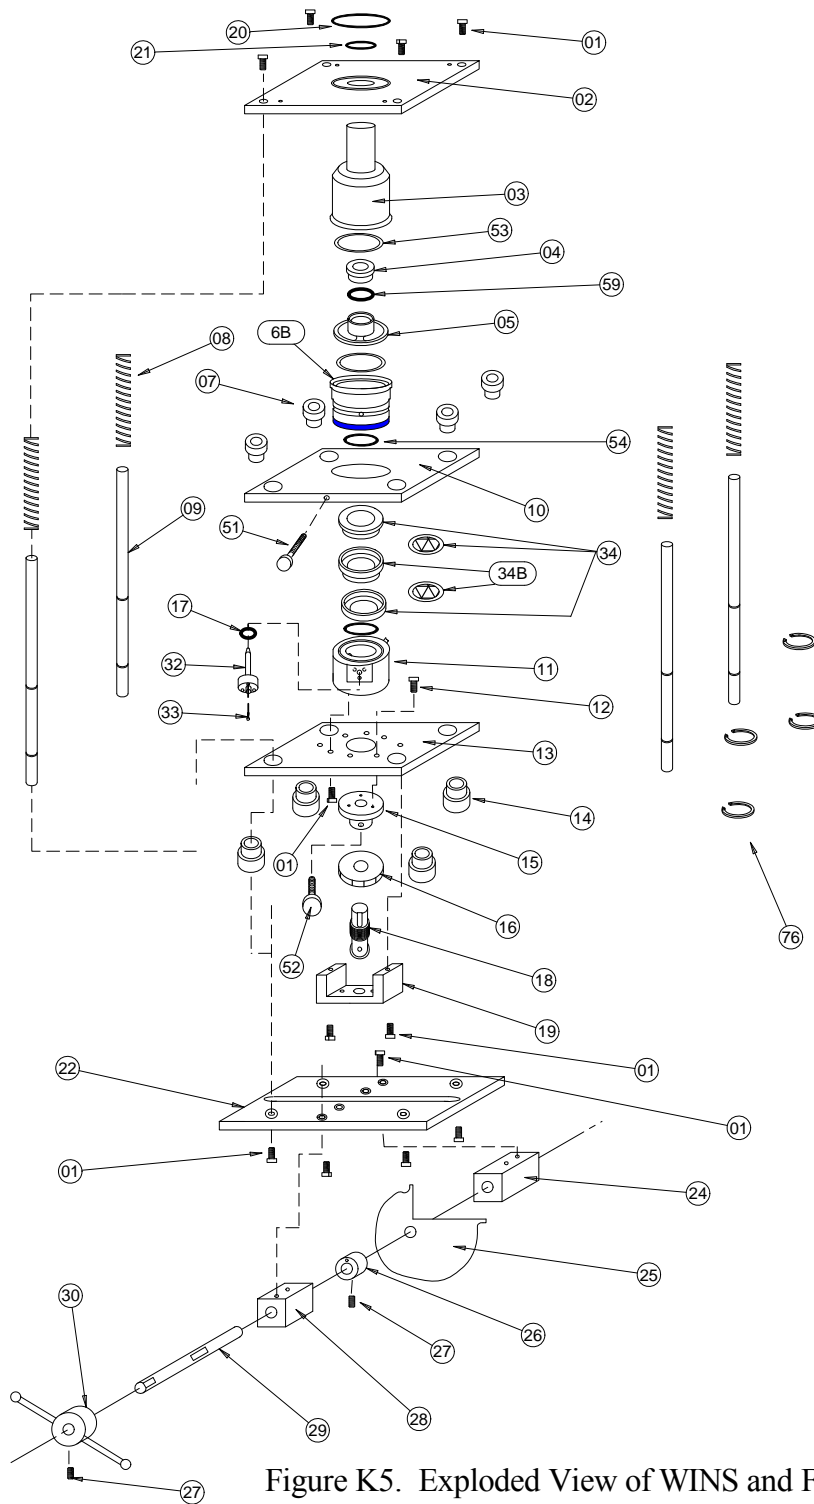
Exploded View of WINS and Filter Assembly for Dual Cassette
